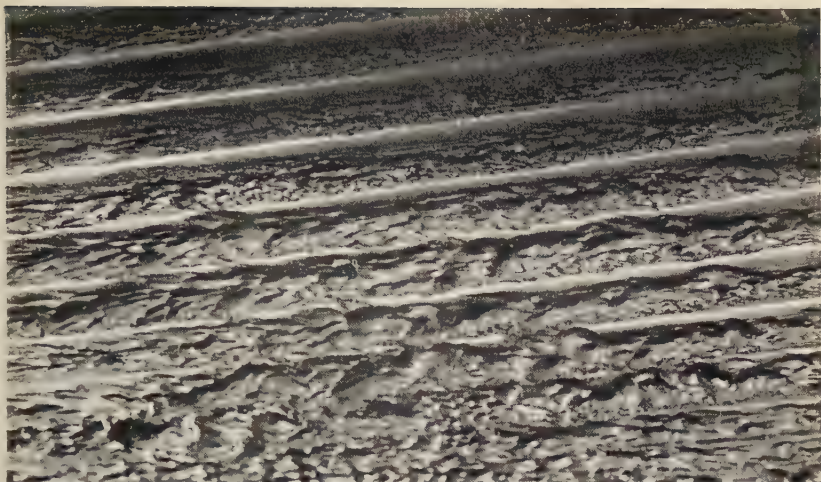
Scoring in 6-in. Mark VII. gun tube. (Two-thirds actual size.)
